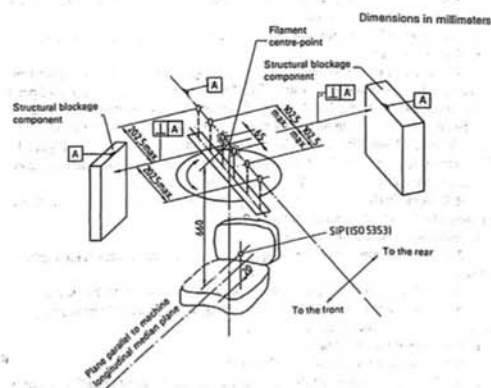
ARRANGEMENT OF TEST EQUIPMENT (SEE SECTION 4)
